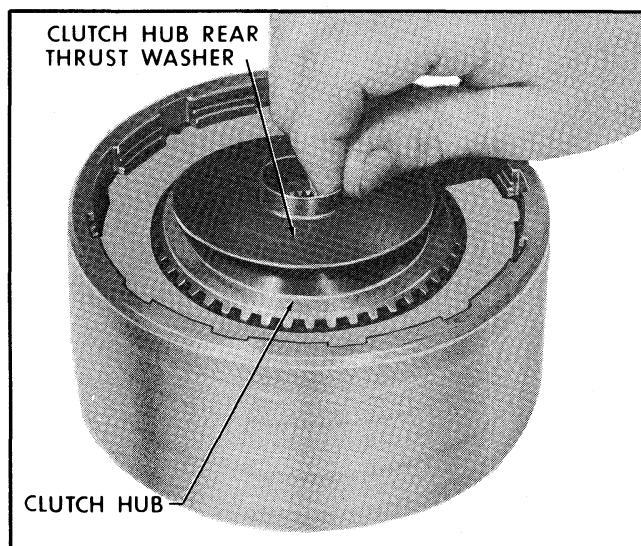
B-72 Removing Clutch Hub Rear Thrust Washer
